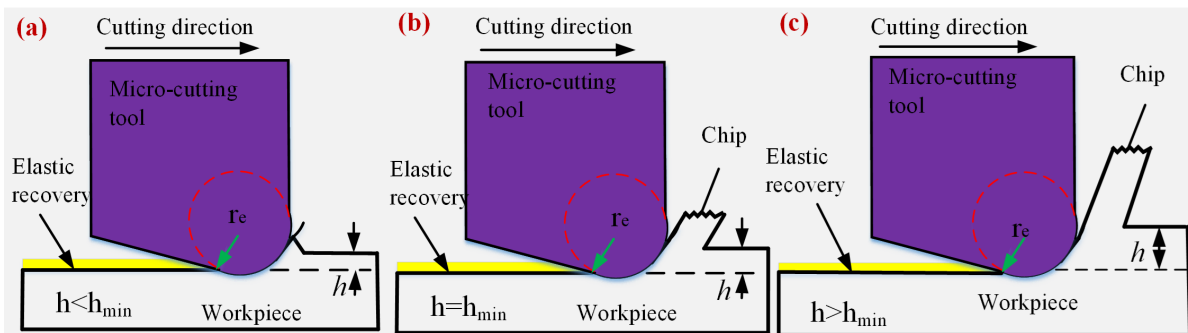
Illustration of microchip removal mechanism.^{80,81}
